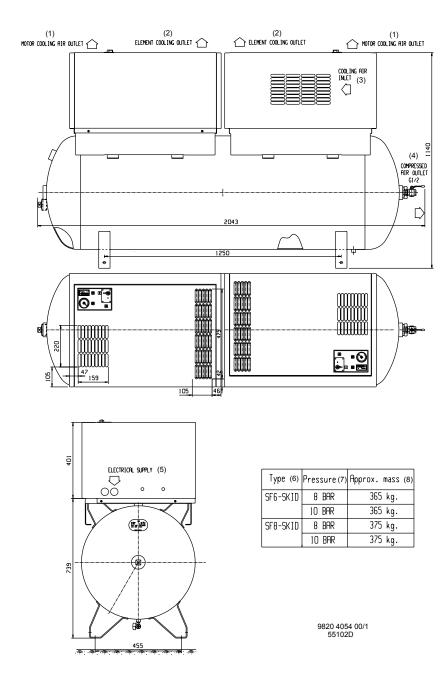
Dimension drawing, SF 6-8 Twin
